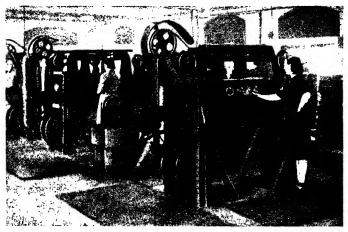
GROUP OF SPARK TESTING SETS IN FACTORY
